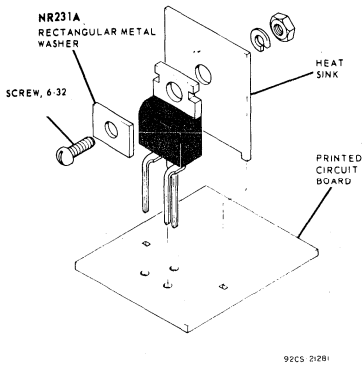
Method of mounting RCA VERSAWATT packages on printed-circuit boards.
